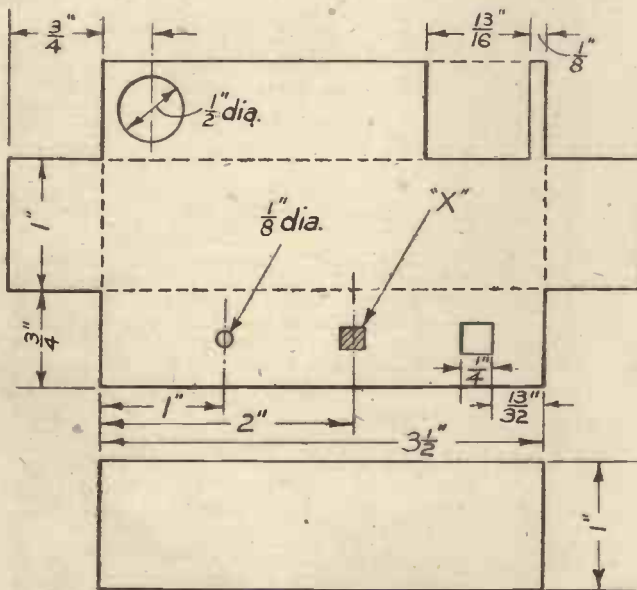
Developed blanks for forming the casing of the range-finder.
